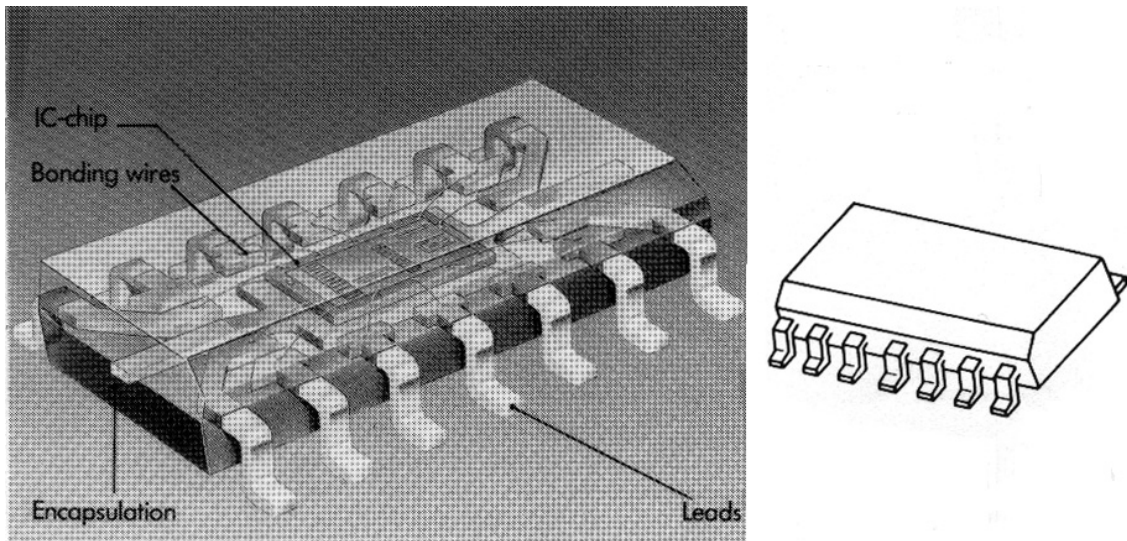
Surface mounted SO (Small Outline) IC package (Philips).
